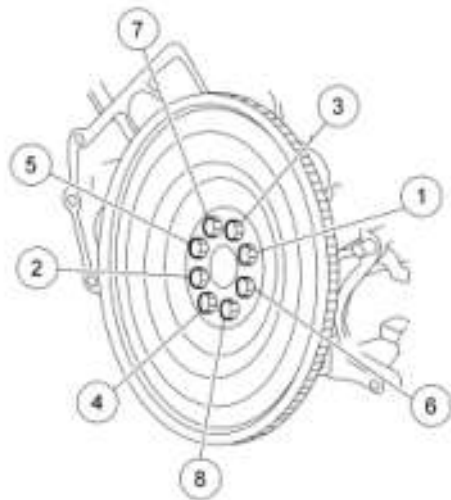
Identifying Tightening Sequence For Flexplate Or Flywheel Bolts
